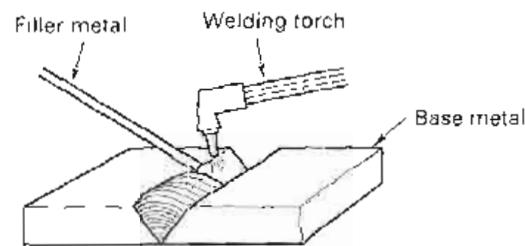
Schematic of the braze-welding process.
